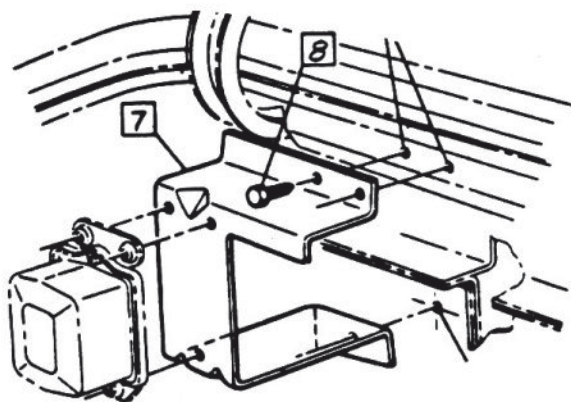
Special voltage regulator mounting for 61-64 air conditioned cars.
